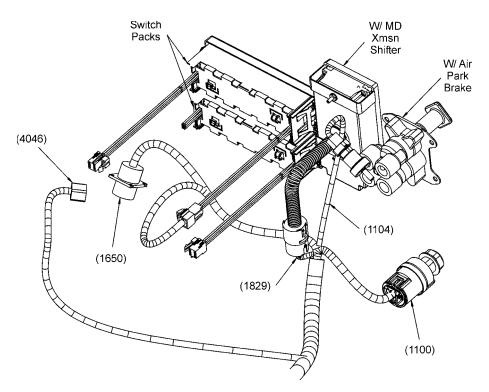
Air Park Brake Switch Location (Steering Column Support View)
